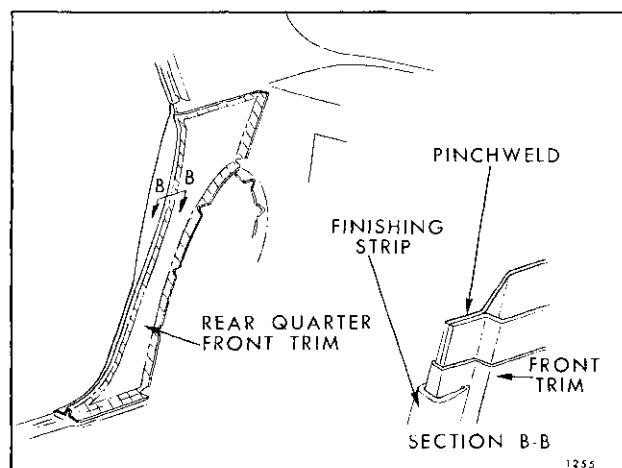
Rear Quarter Trim Assembly - "A" Four - Door Styles
